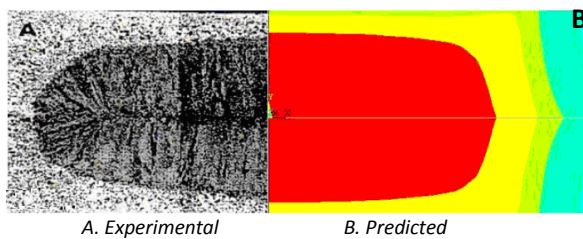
Schematic of predicted and experimental weld nugget cross-section dimensions
